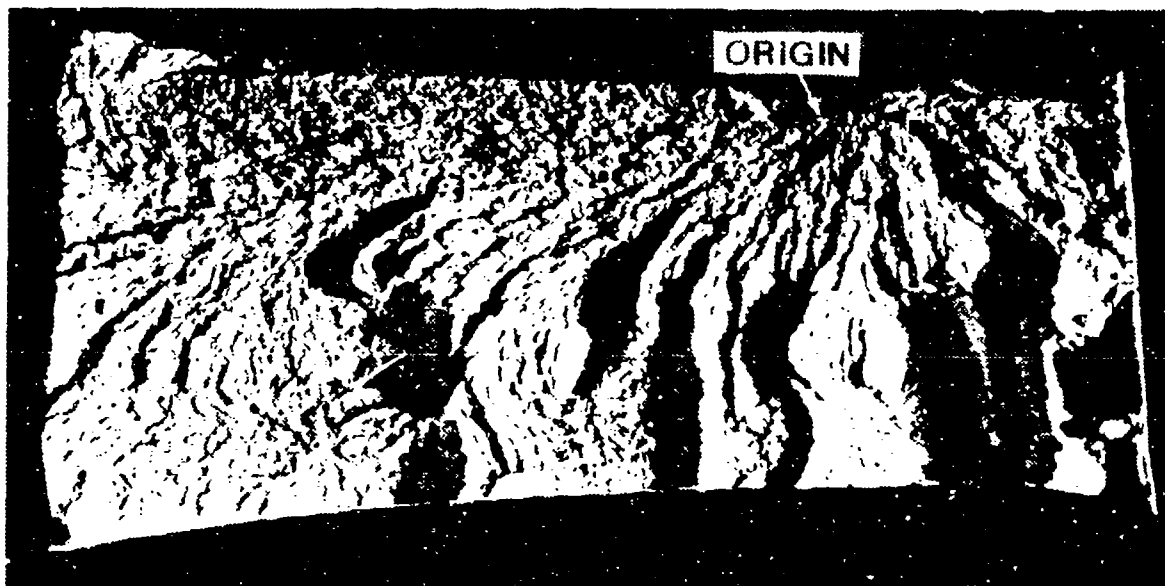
Fracture Surface at the Origin of a Significant Fracture at a Weld Crack
